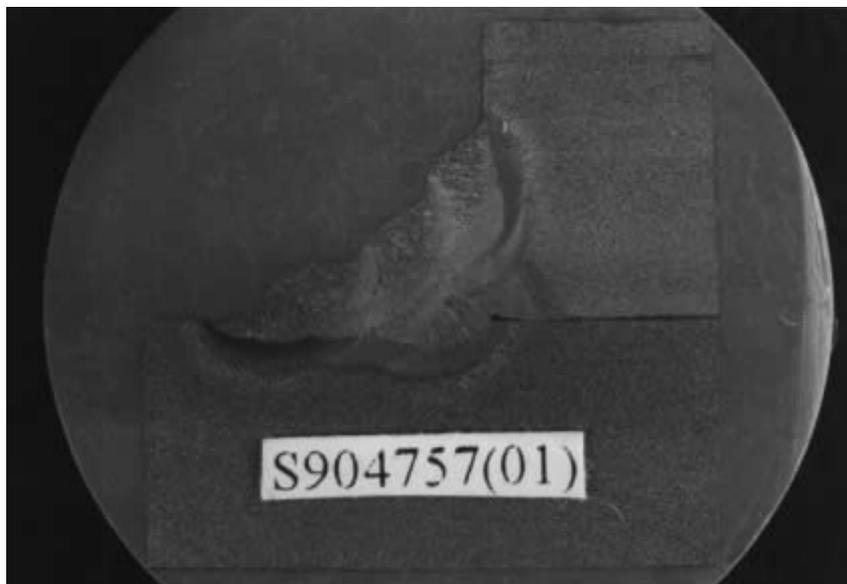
Shows a macro photo of the weld at (x3.4) magnification.
